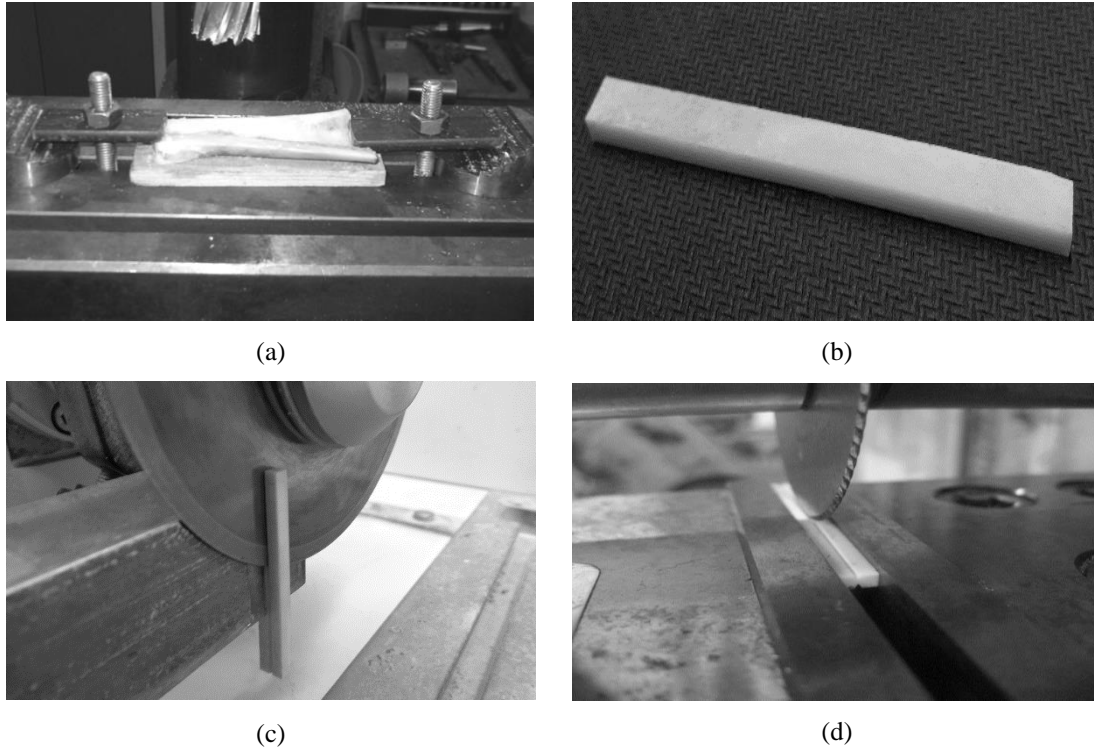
Machining operations: (a) milling; (b) specimen for three point bending test; (c) pre-crack execution; (d) creating lateral grooves.
